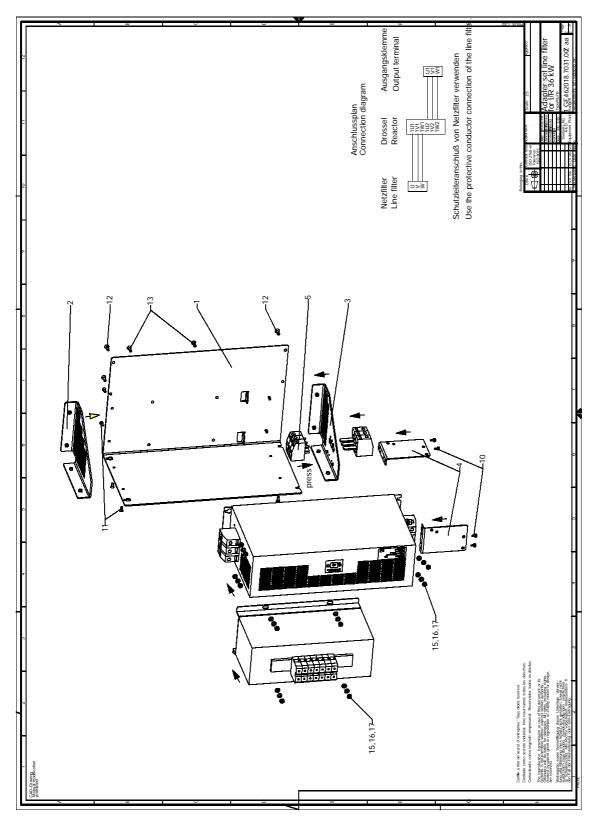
Adapter set, line filter for I/R module 36 kW, 6SN1162-0GA00-0CAx; mounting
